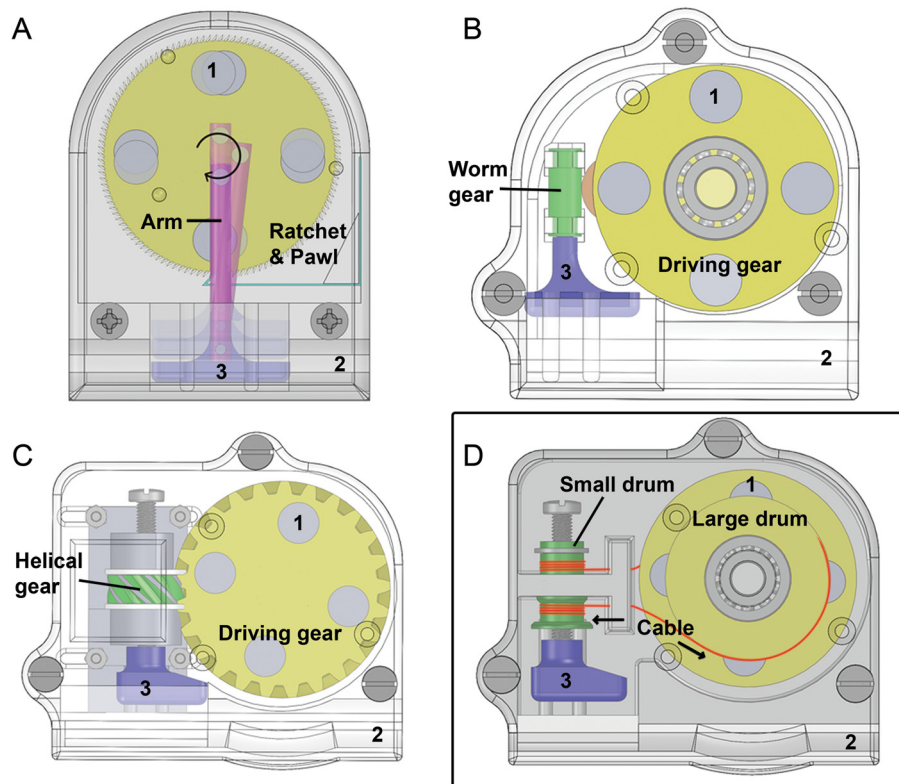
The four concepts for the drive mechanism for transmitting motion from the magnets in the wand to compression of the graft: (a) slider crank, (b) worm gear, (c) helical gear, and (d) winch designs. Components common to all designs are labeled with numbers: magnets (1), slot for graft insertion (2), plate that compresses the graft (3). The winch design (circled) was ultimately selected for its simplicity and functionality.
